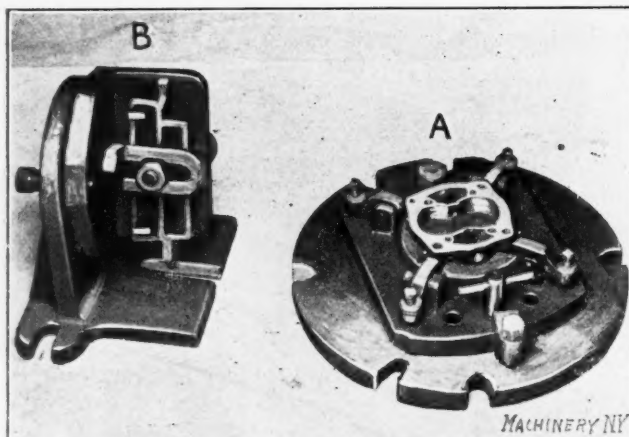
Fixture for Milling Quadrants, and Oil Pump Casing
